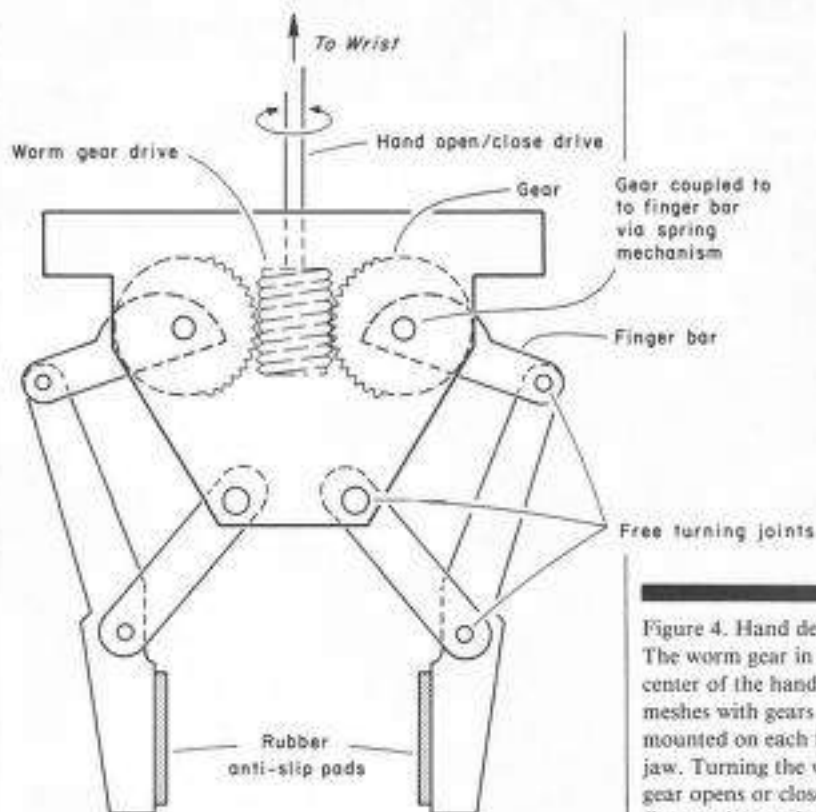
Hand design. The worm gear in the center of the hand meshes with gears mounted on each finger jaw. Turning the worm gear opens or closes the fingers via a spring coupling.
